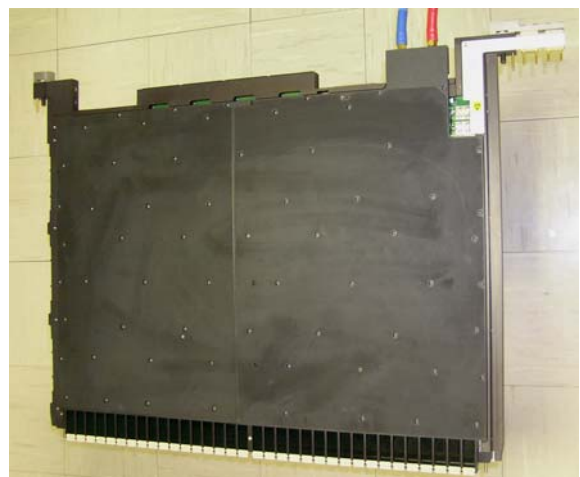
Final Assembly with Cold Plate Attached to Motherboard
